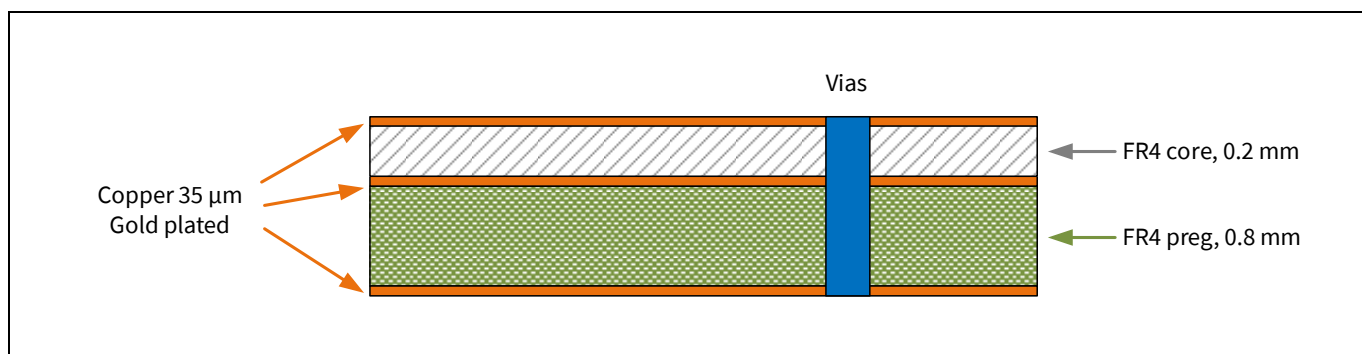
PCB stack information for the evaluation board with the PCB marking M11118
